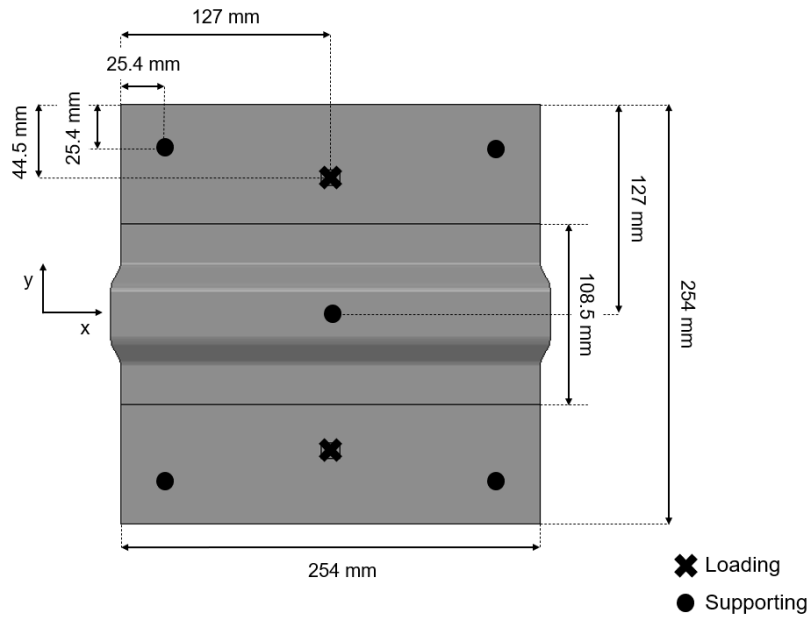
Top view of the 7PB specimen showing relevant dimensions.
